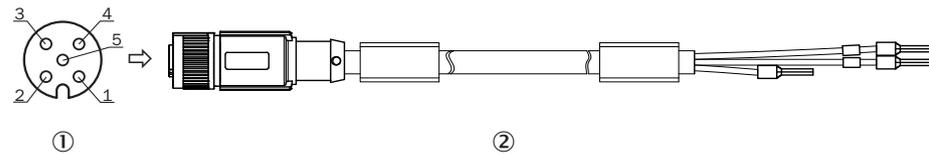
Adapter cable, e.g., part no. 6053224 (5 m)
